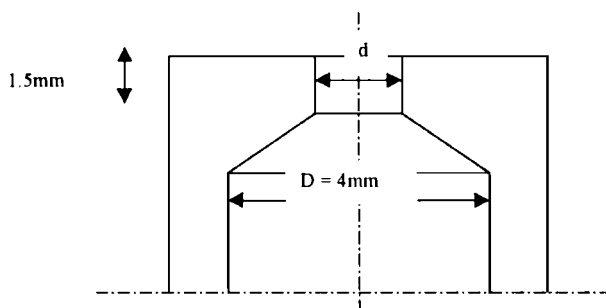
Design and dimensions of the fuel-jet nozzle.
